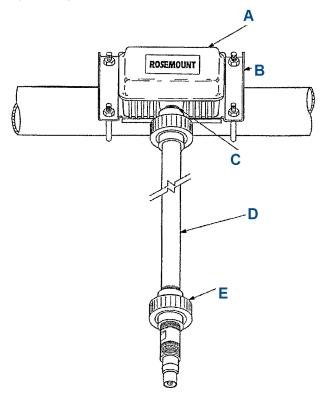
Handrail Mounting Assembly (PN 11275-01)
